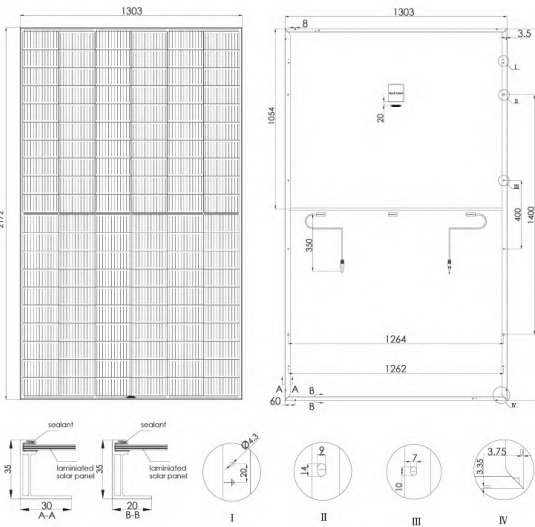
External dimensions (inmm) and components for SR-60MAXH
